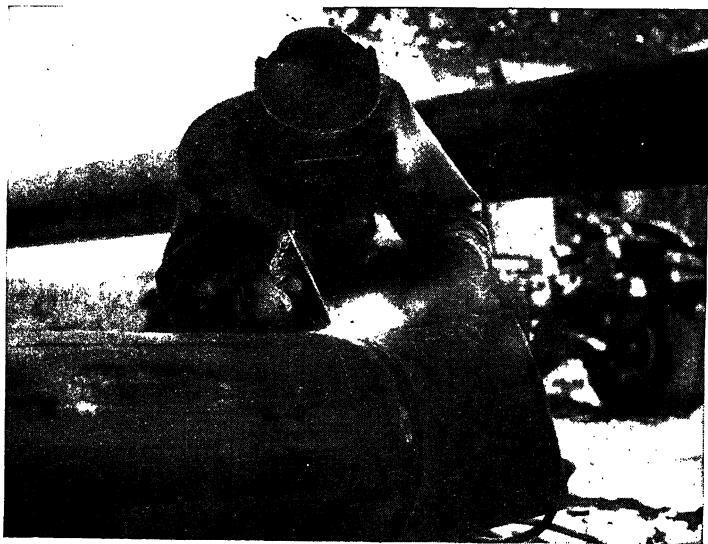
Making a rolling pipe weld. (Courtesy of Lincoln Electric Co.)
